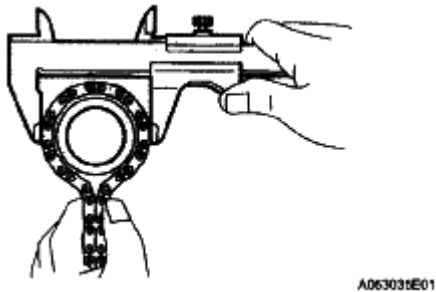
Identifying Diameter Of Timing Gear And Chain
